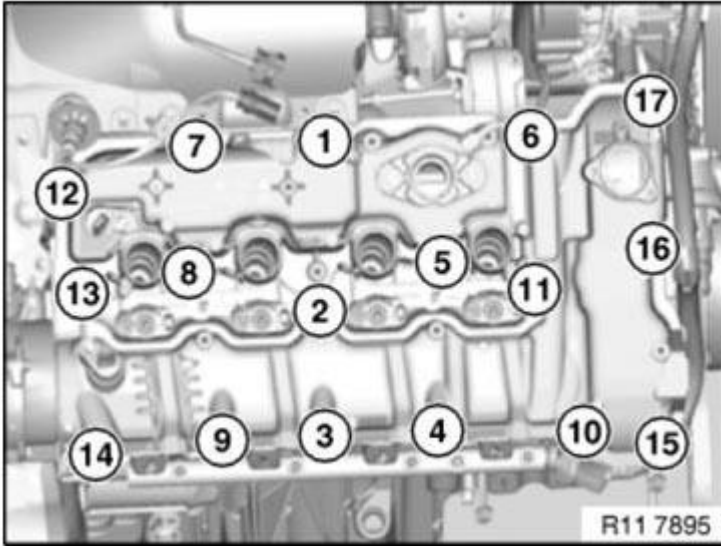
Identifying Cylinder Head Cover Bolts Releasing Sequence
